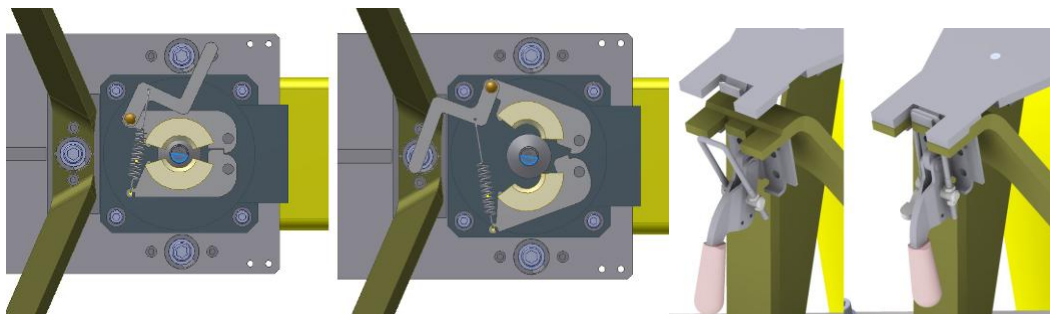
Possible PACT/SA I/F (left) and Fixed Frame/SA I/F (right) using tool-free clamping concepts
